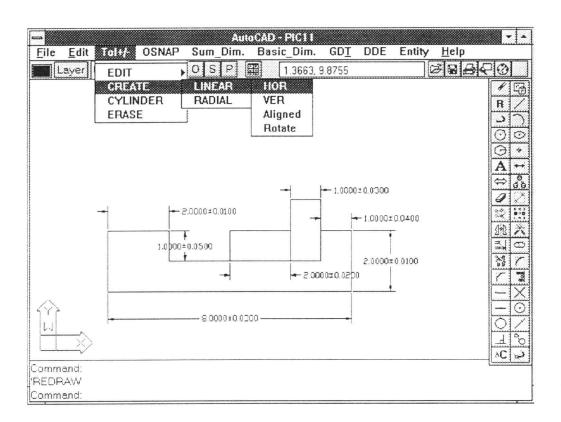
The Function of "Tol+/-" Pull-Down Menu for Creating Conventional Tolerances in the Assembly Drawing
